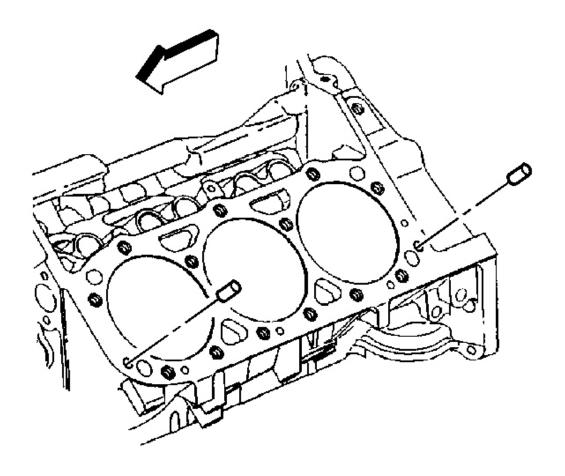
View Of Cylinder Head Locator Pins Courtesy of GENERAL MOTORS CORP.
